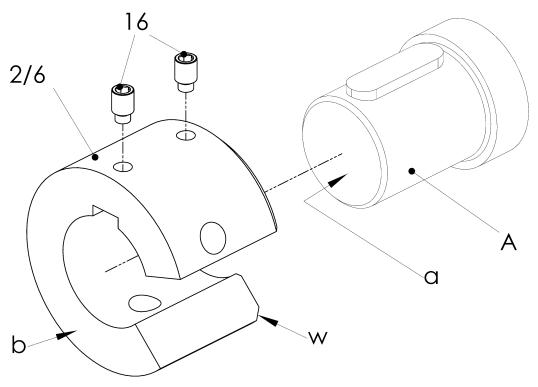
Mounting the hub (2/6) with cylindrical drilling and feather key
